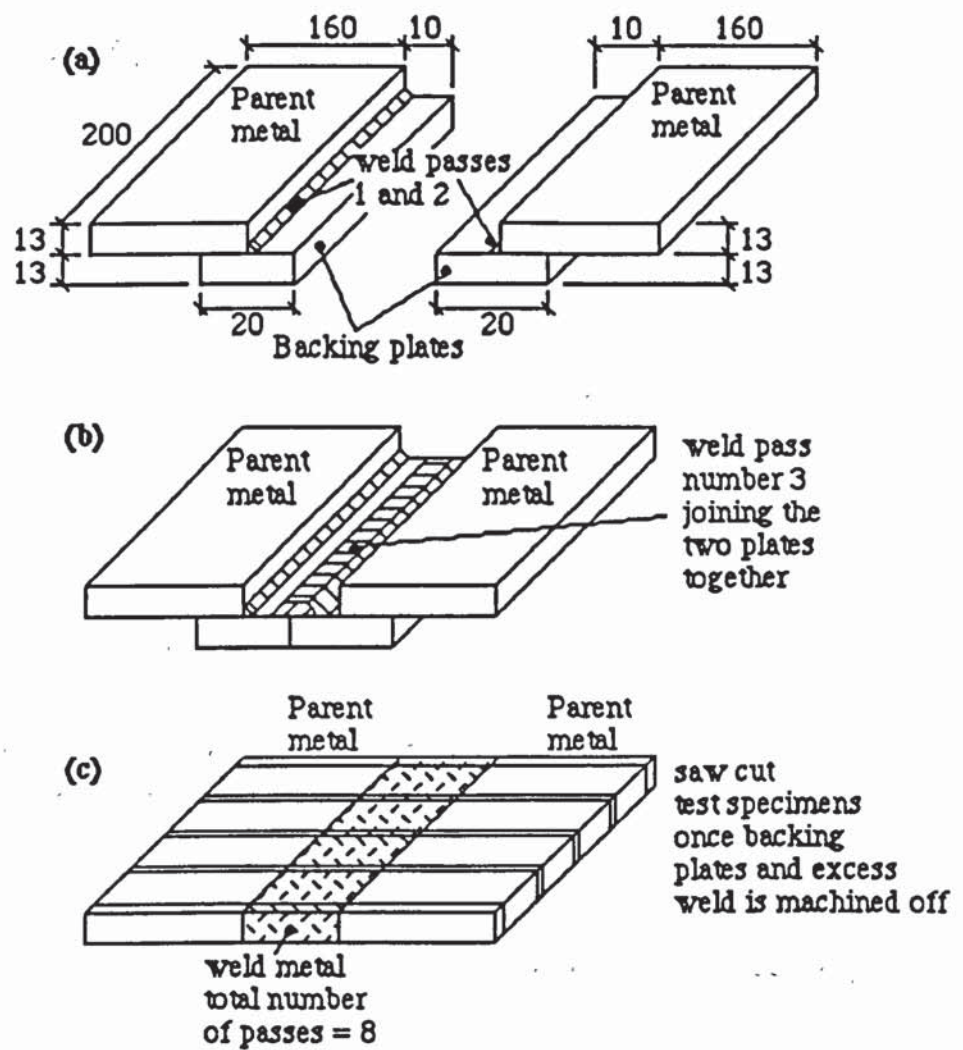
Preparation of transverse weld coupon test specimen.
